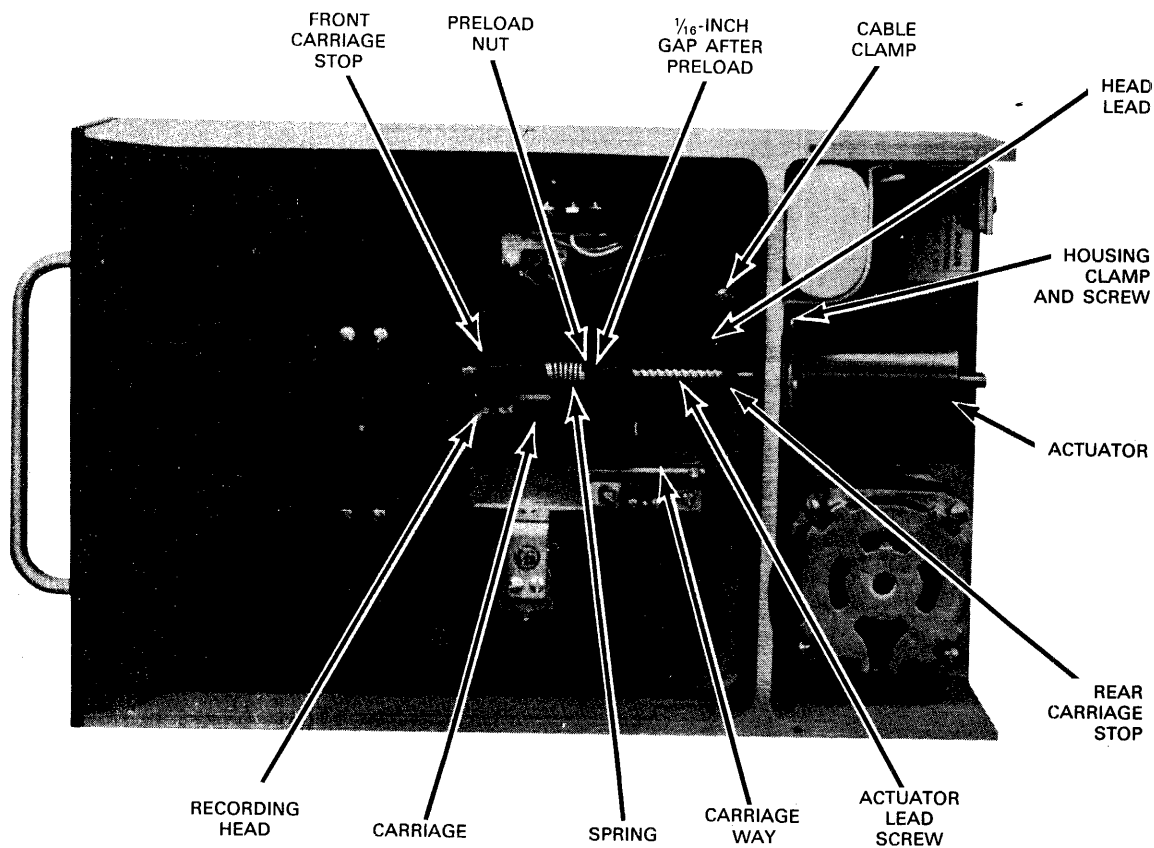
Head Carriage and Head Position Actuator Removal and Replacement
